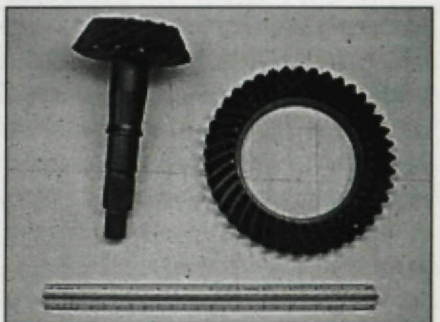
ADI Hypoid Ring and Pinion Gears.
